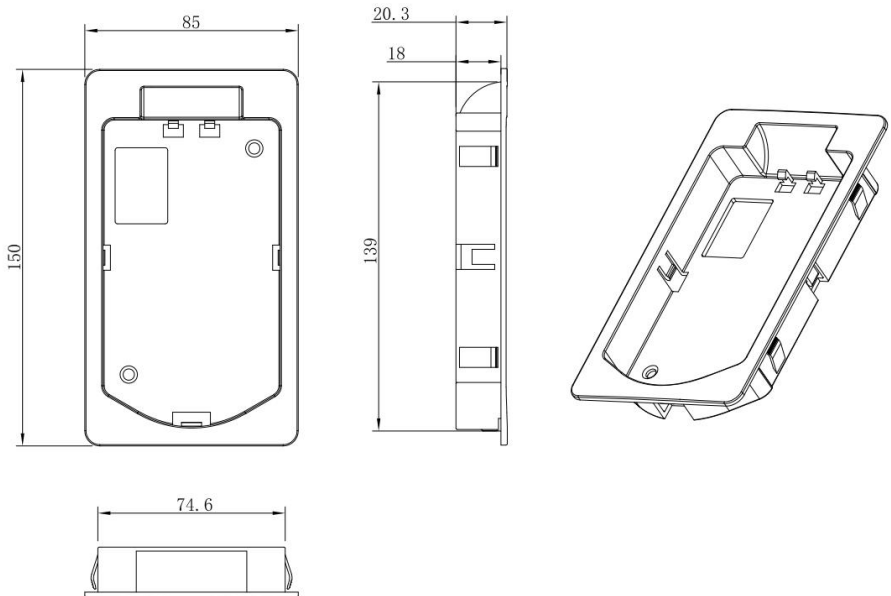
External Dimensions of Control Panel Bracket
